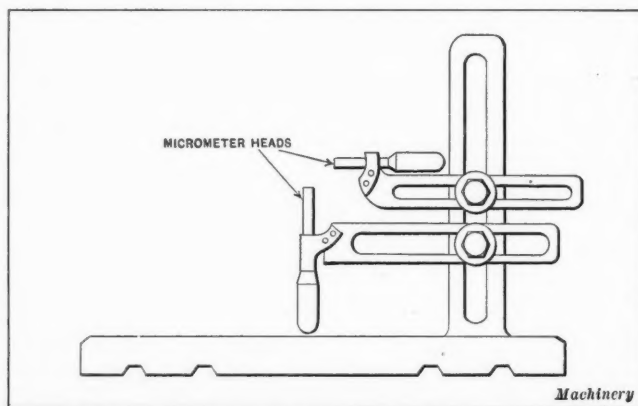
Measuring Tool used with Bars B and C for testing Alignment of Headstock and Tailstock
